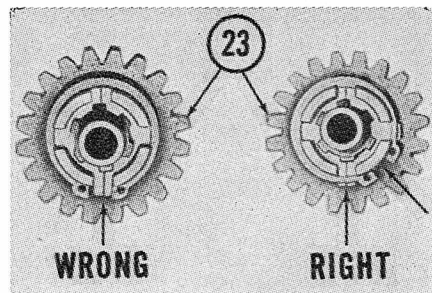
View of fourth gear, positioning pieces and snap ring (23, 24 & 25—Fig. S3-18) assembled. Split in positioning pieces and opening in snap ring should not be aligned.
